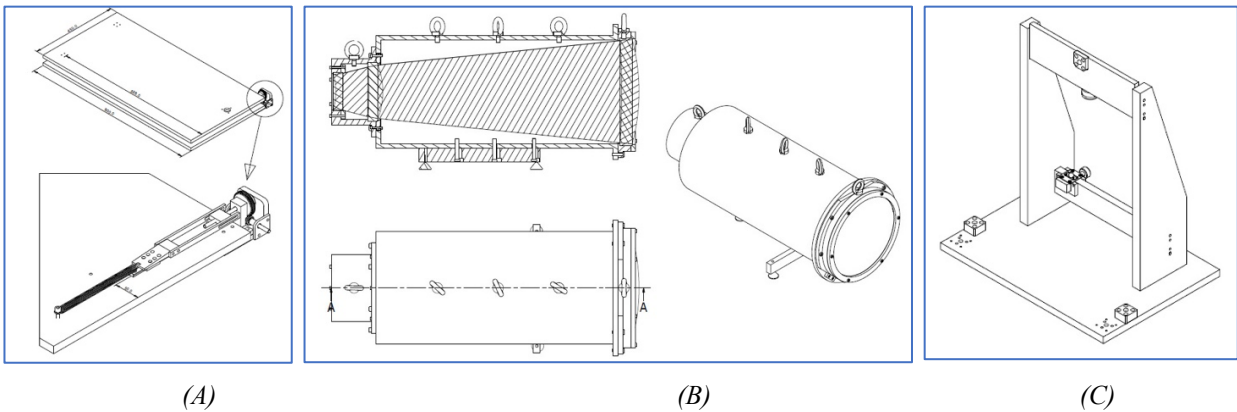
Drawing of the interferometer support (A), the beam expander tube (B) and the holder for the cylindrical master (C)
